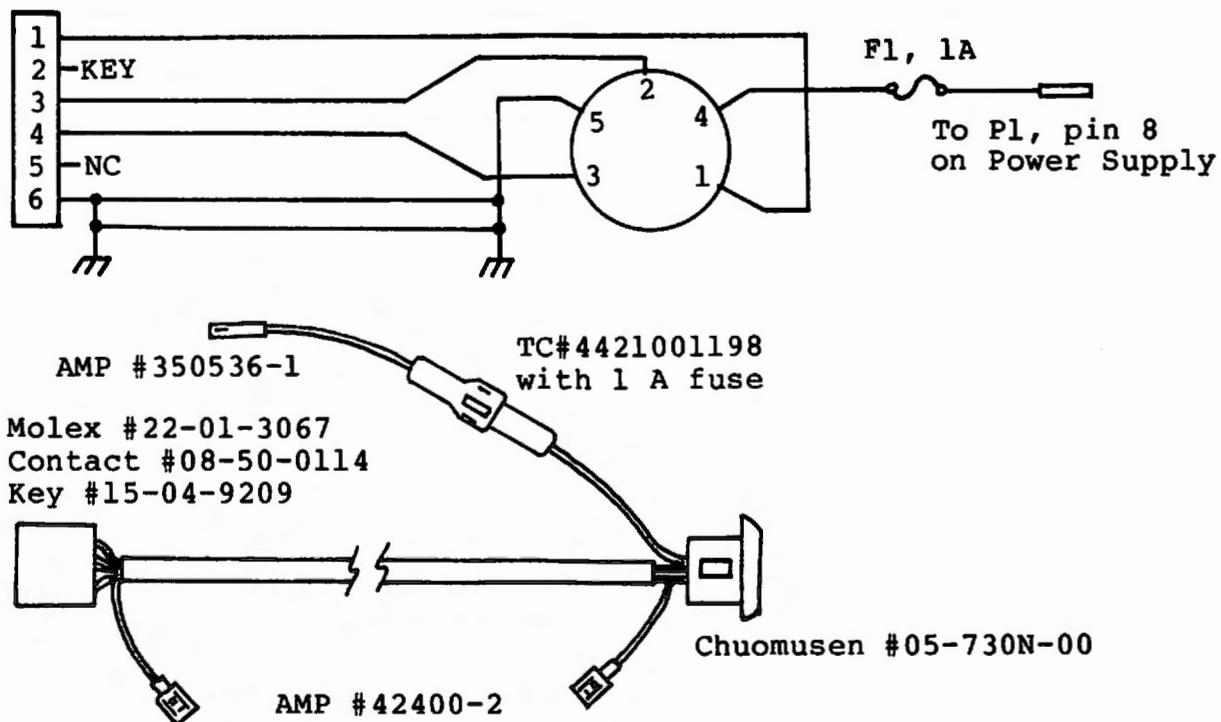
Video/Keyboard PCB to Keyboard Cable
